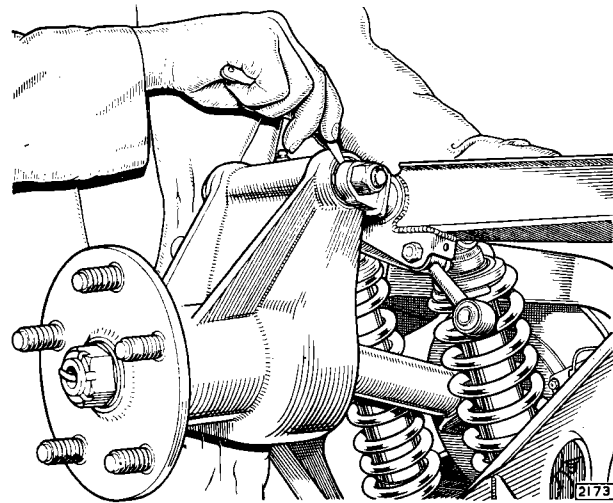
Using feeler gauges to measure the clearance between the hub carrier oil seal tracks and wishbone fork
